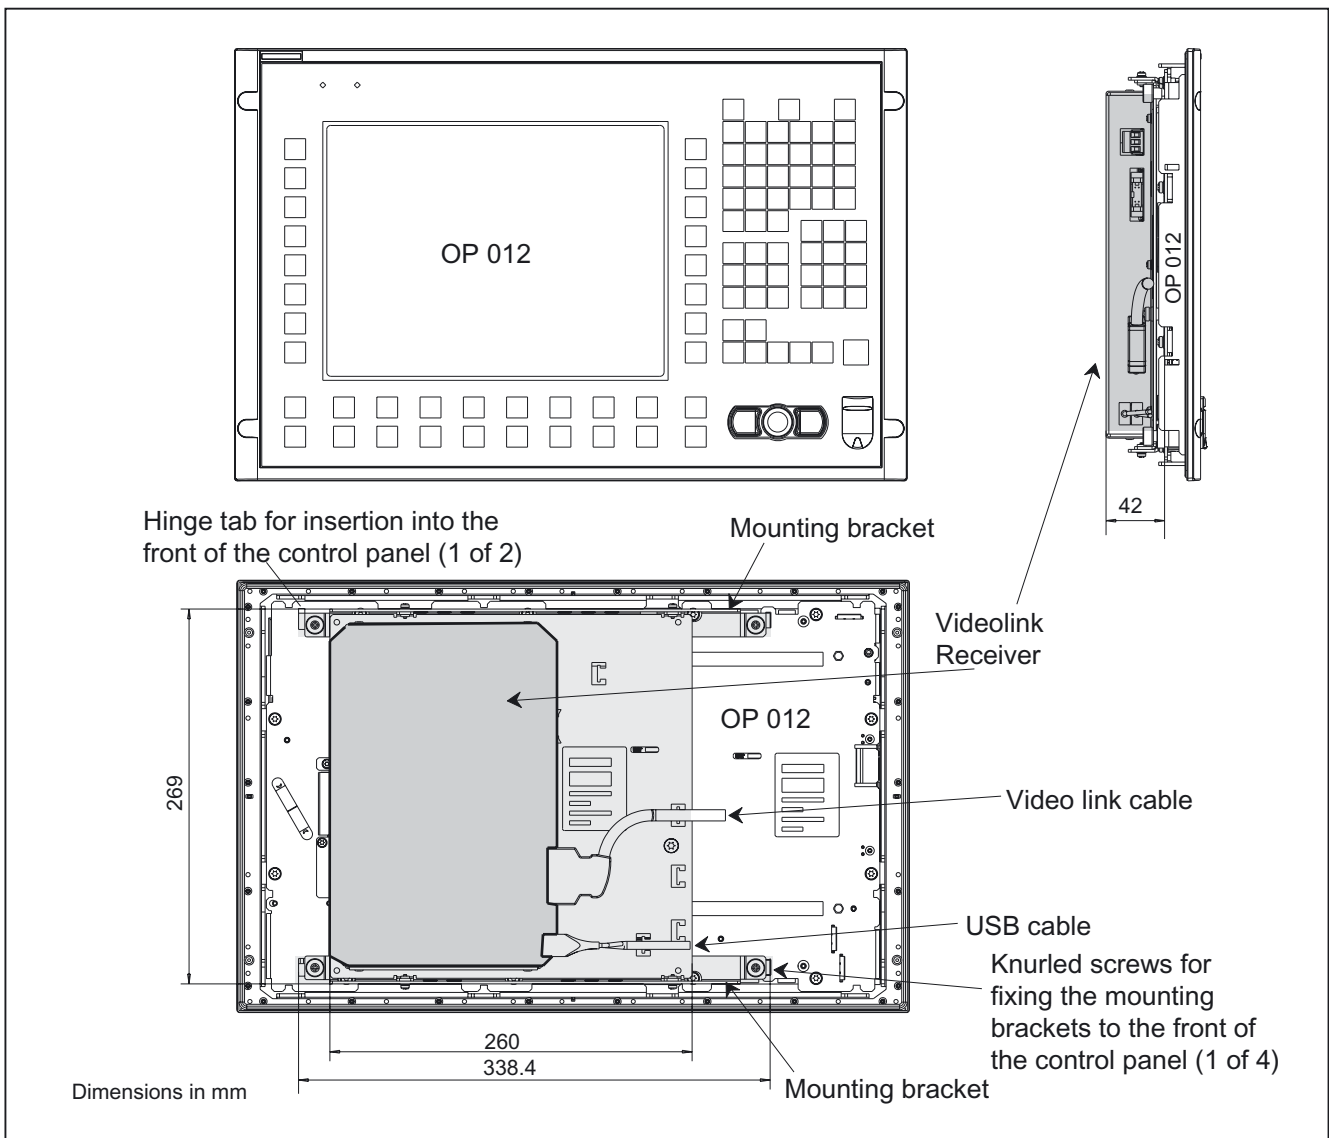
Operator panel front (example, OP 012 with attached videolink receiver Order No. 6FC5247-0AF22-0AA0), front, rear and side view
